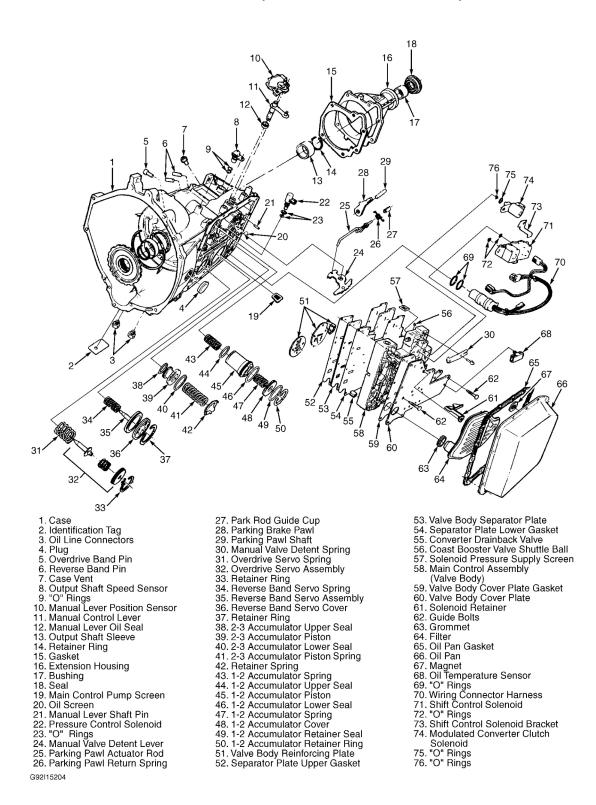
Exploded View Of 4R70W Valve Body, Servos, Accumulators & Case Components
